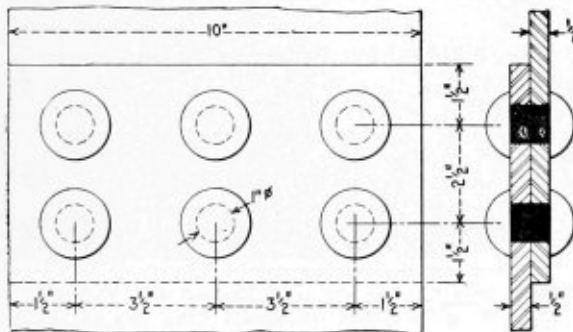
(a).—Double Riveted Lap Joint, Chain Riveting
